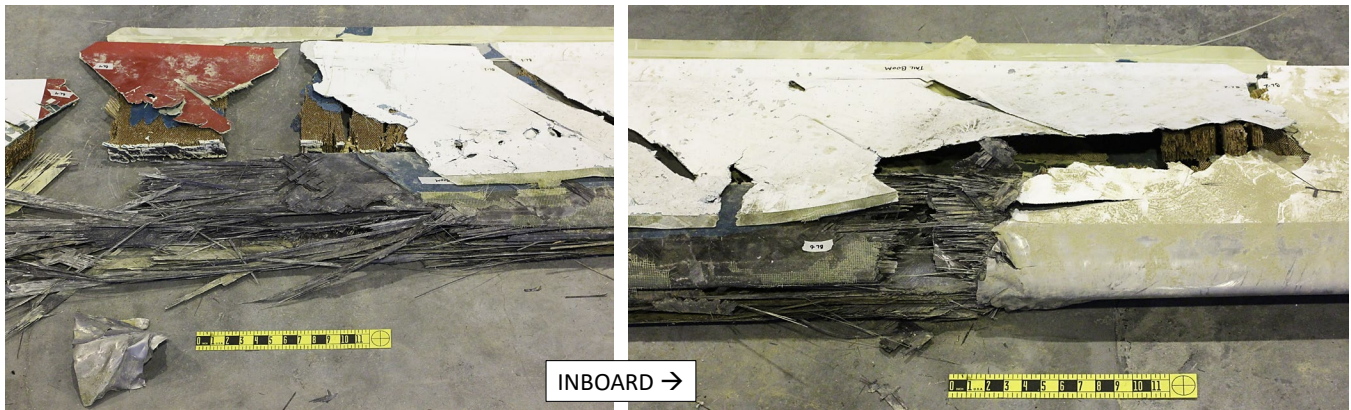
Photograph of the upper surface of the blue blade BS 325 fracture location (left) and the BS 277 fracture location (right) with spar and skin pieces partially reconstructed.
